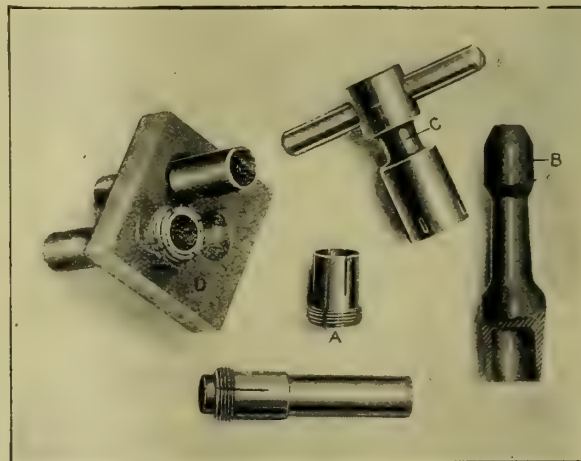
PARTS OF L.E.B. CONDENSER FERRULE OUTFIT. MESSRS. THE L.E.B. ENGINEERING COMPANY, LTD., LONDON.
